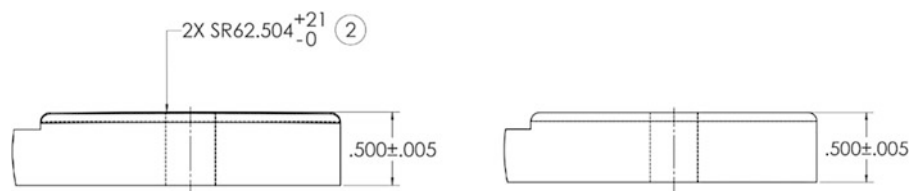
Drawing of the convex (left) and flat (right) interfaces
